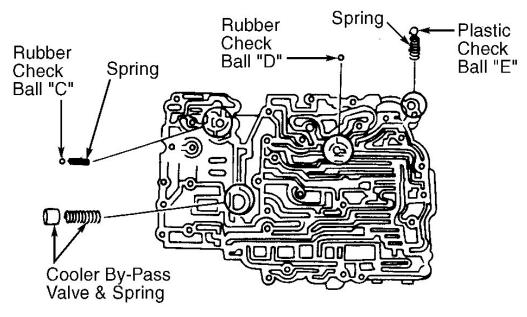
Exploded View Of Valve Body Assembly Courtesy of ISUZU MOTOR CO.
